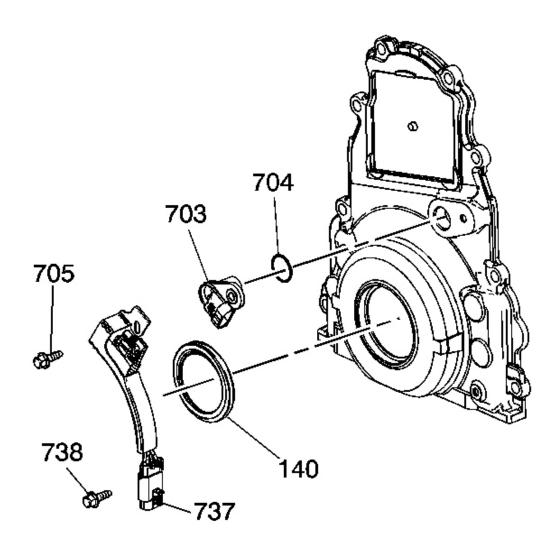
Engine Front Cover, Camshaft Position Sensor, Oil Seal, Wire Harness, O-Ring & Bolts
